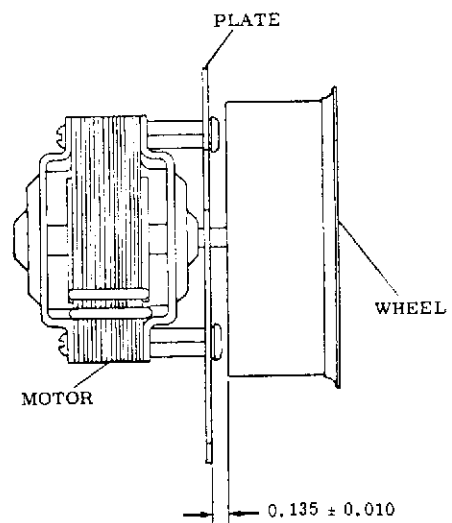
MOTOR MOUNTING PLATE ASSEMBLY.
